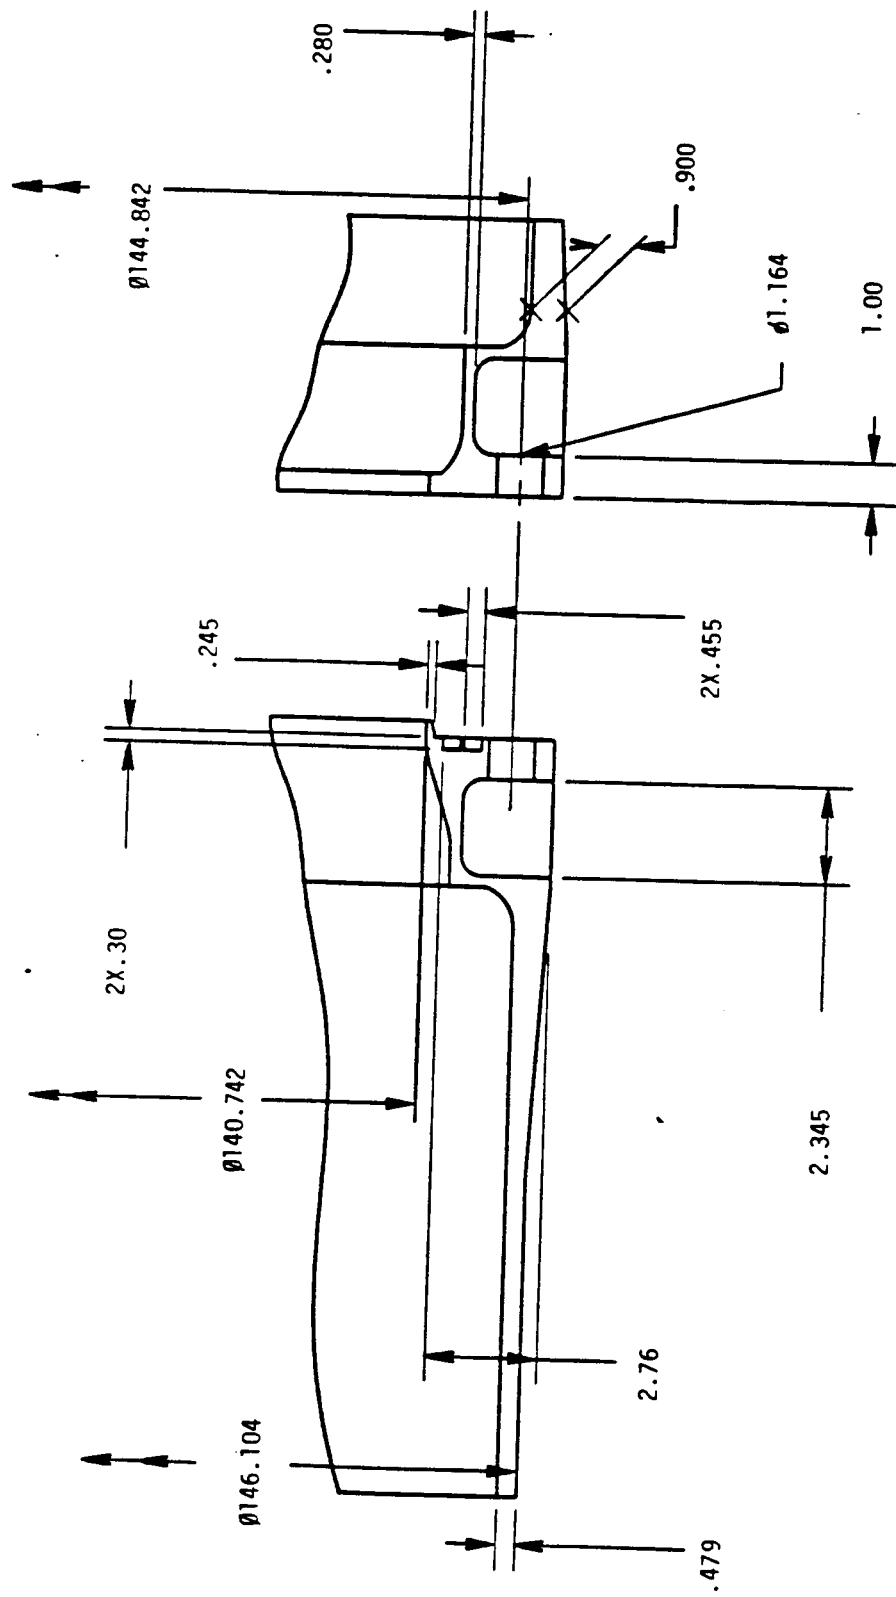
IN-LINE BOLTED JOINT CRITICAL DIMENSIONS
